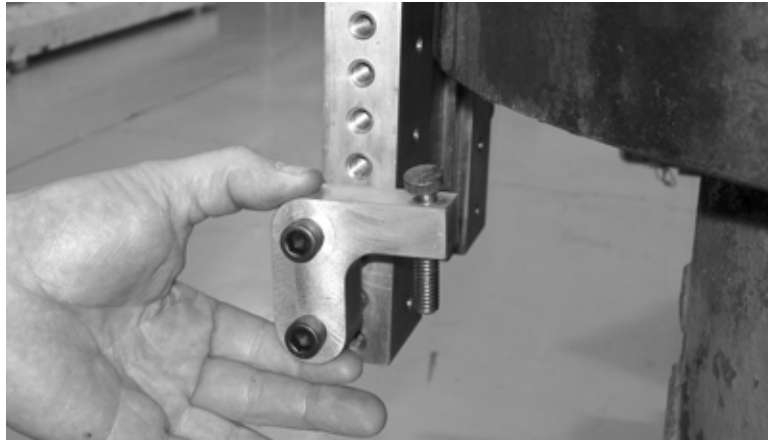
Set the side legs to the appropriate height for the saddle's position on the flange. The head of the clamping screw will need to be against the bottom of the flange.
